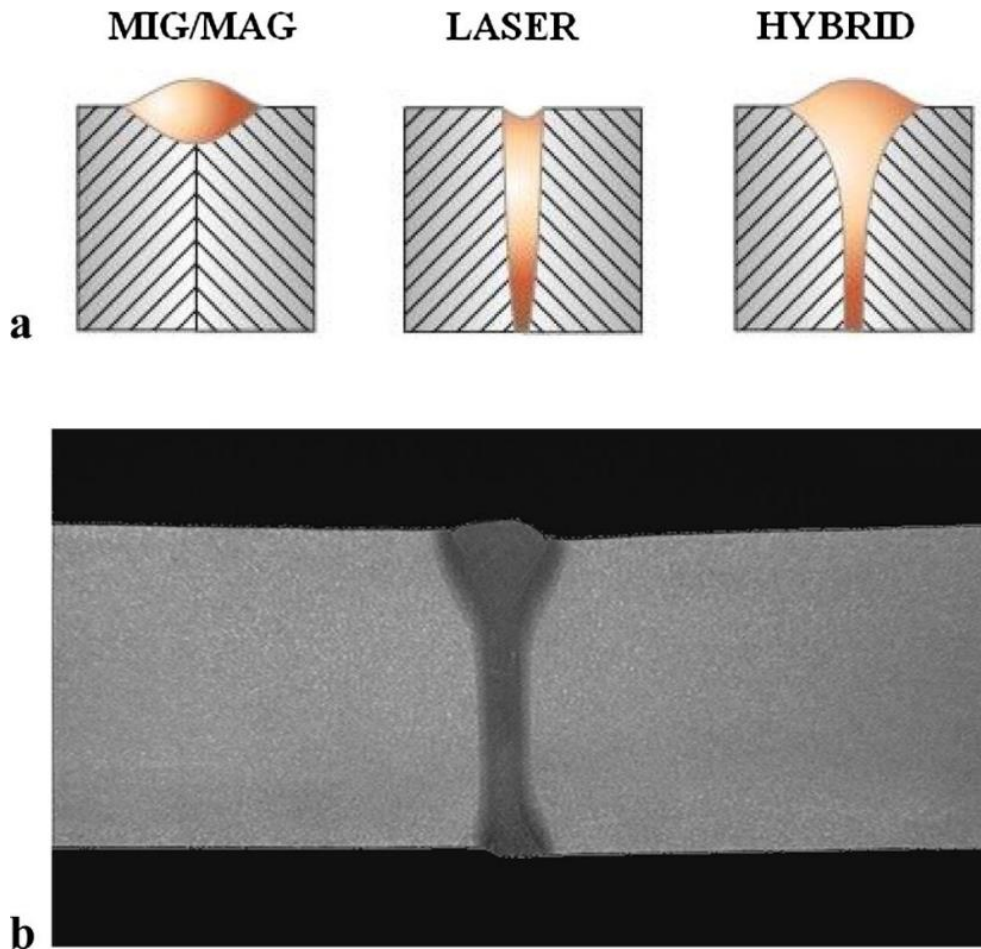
(a) Patterns of weld formation during arc welding, laser welding and hybrid laser arc welding; (b) cross-sectional view of a hybrid laser arc weld. Reprinted with permission [27]. Copy right 2018, Elsevier.
